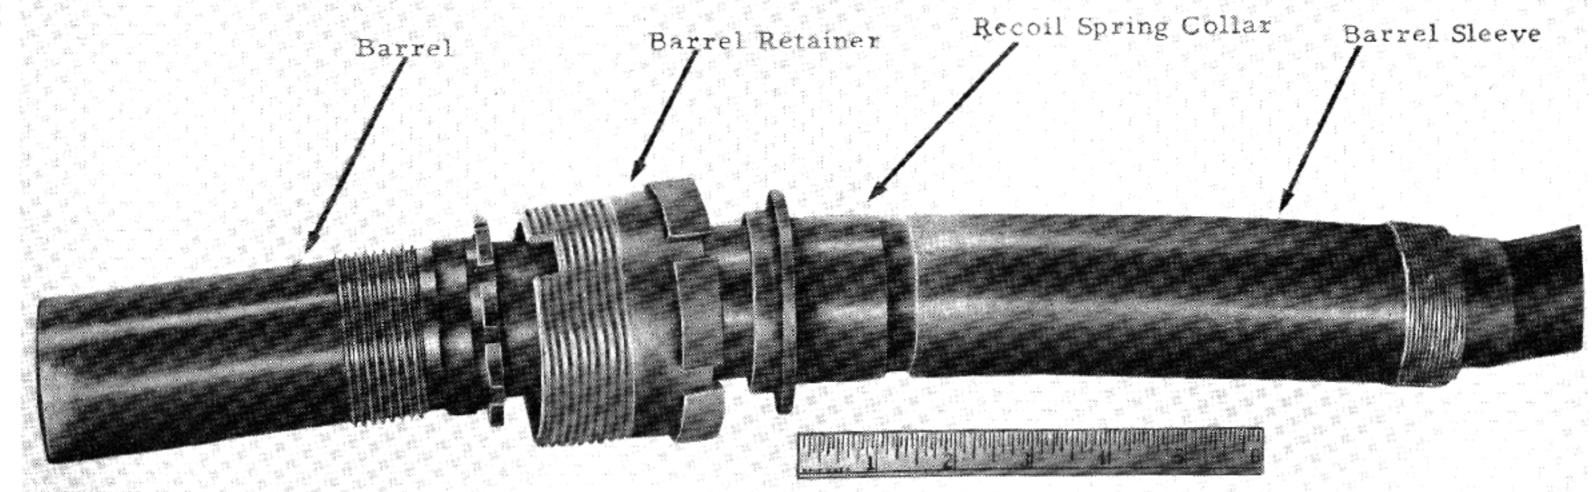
Barrel, barrel sleeve, recoil spring collar and barrel retainer for 23-mm NS Gun.
